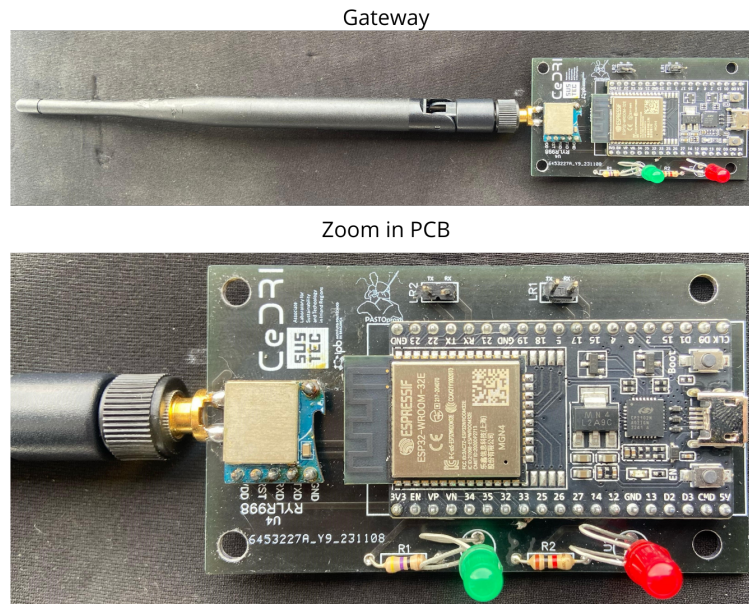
Gateway PCB soldered. In top have the complete gateway and in bottom a zoom in the PCB.
